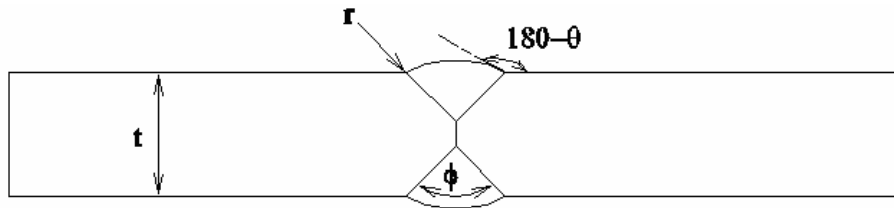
Geometric Weld parameters that influence the weld geometry
